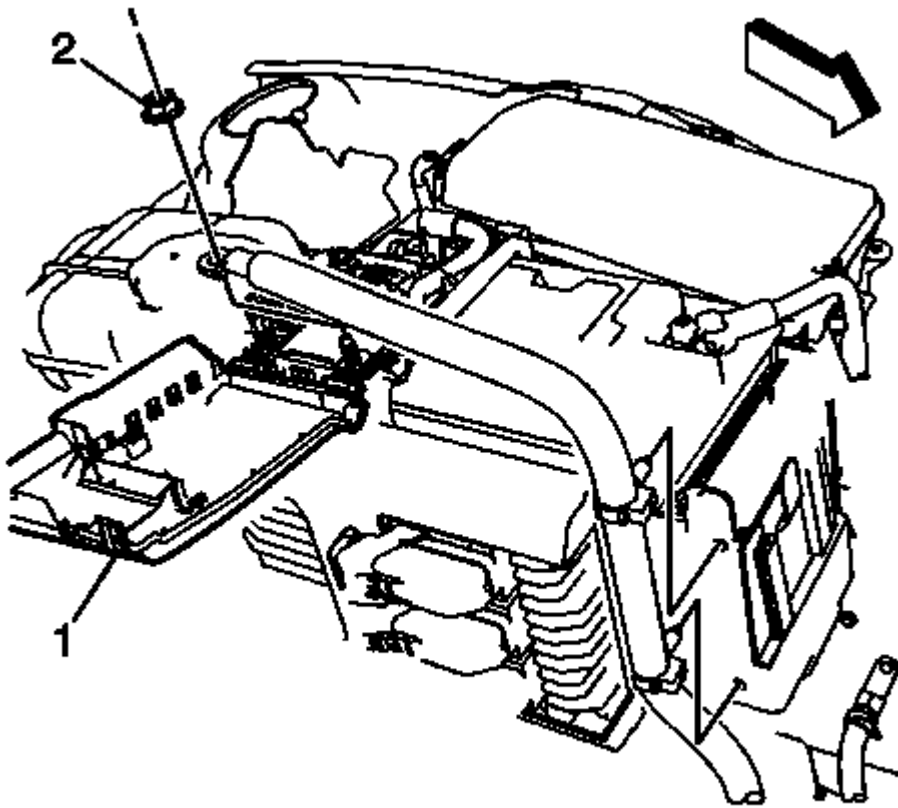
Positive Battery Cable Terminal, Nut And Fuse Block Cover
